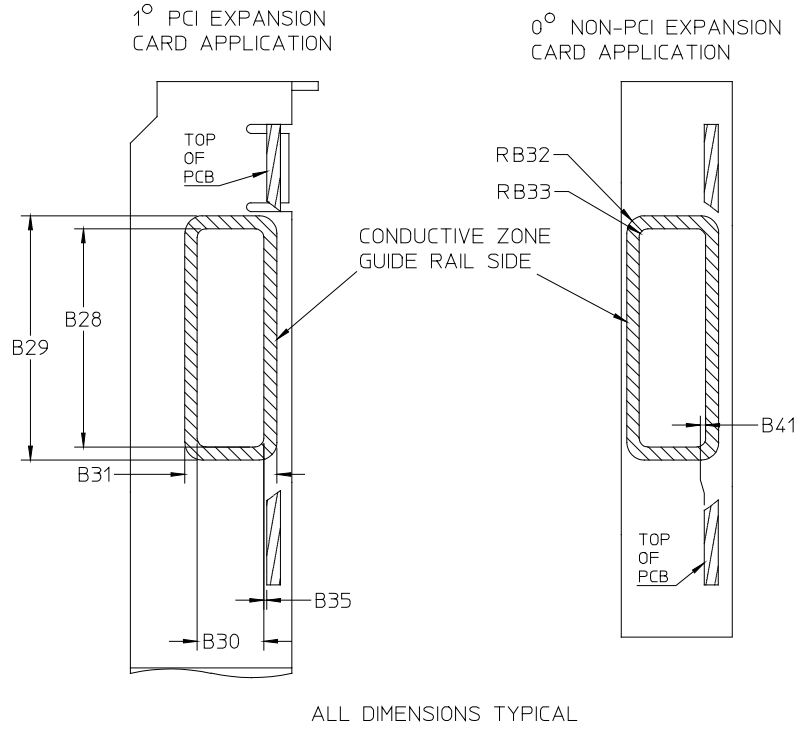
x4 EMI Guide Housing Assembly Bracket Window
